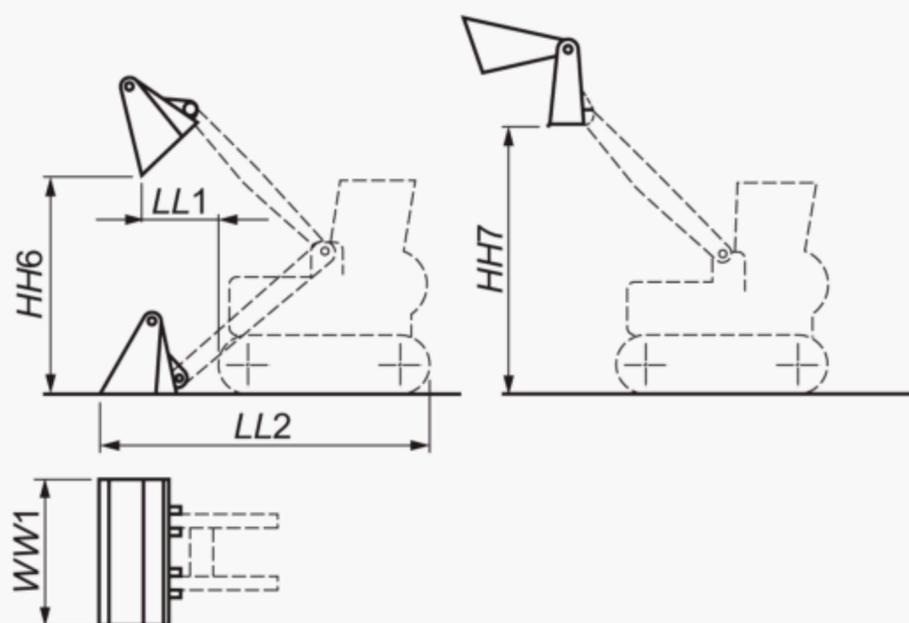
Dimensions of equipment and multi-purpose bucket installed on loaders
